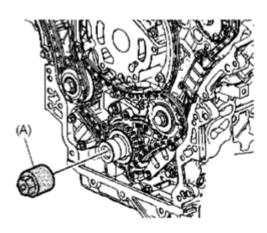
Identifying Crankshaft Rotation Socket Courtesy of SUZUKI OF AMERICA CORP.
